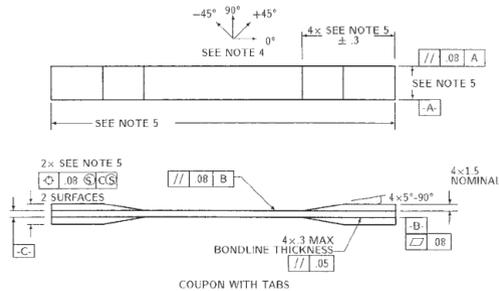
Tensile Test Specimen according to ASTM D3039 [22]
